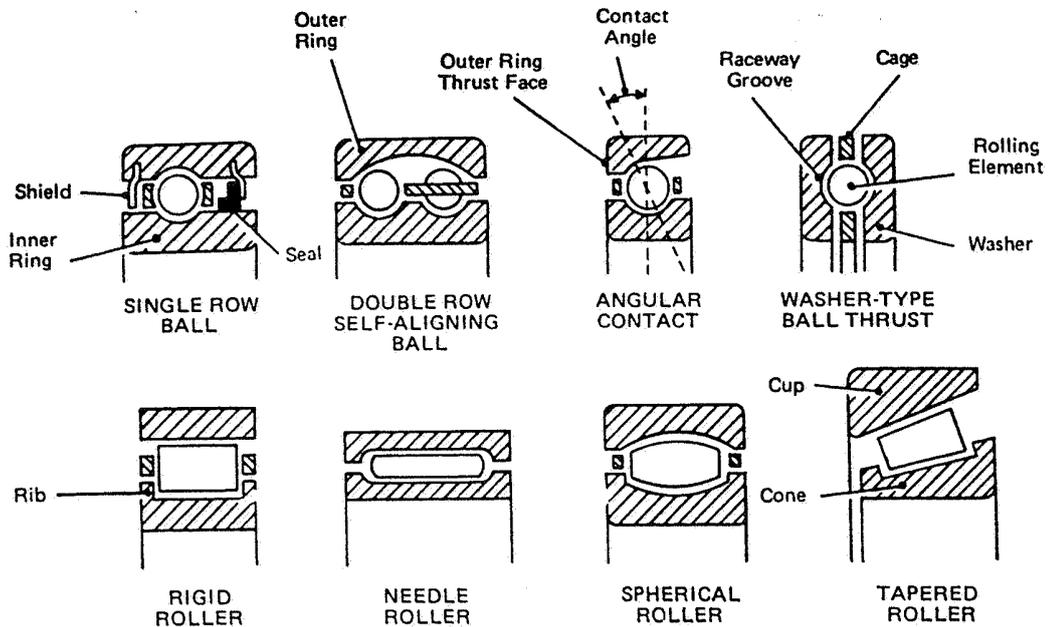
EXAMPLES OF BALL AND ROLLER BEARINGS
